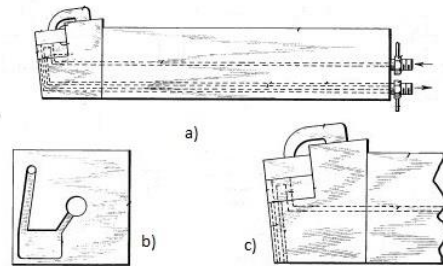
a) a side view of a tool holder, seat and cutting insert modified to incorporate the on-line tool condition sensing system; b) a plan view of the coolant channel machined into the cutting tool seat; c) a partial side view of the tool holder, seat and insert, showing an alternate location of the tool holder exit channel for coolant flow [11]
